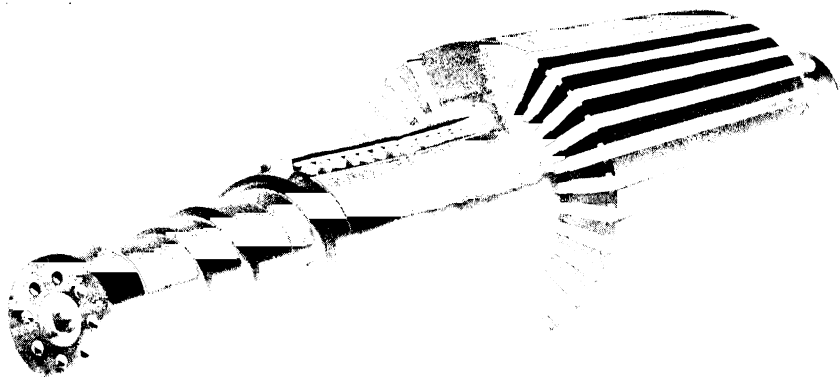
Cylindrical rotor of a 2-pole synchronous machine.
